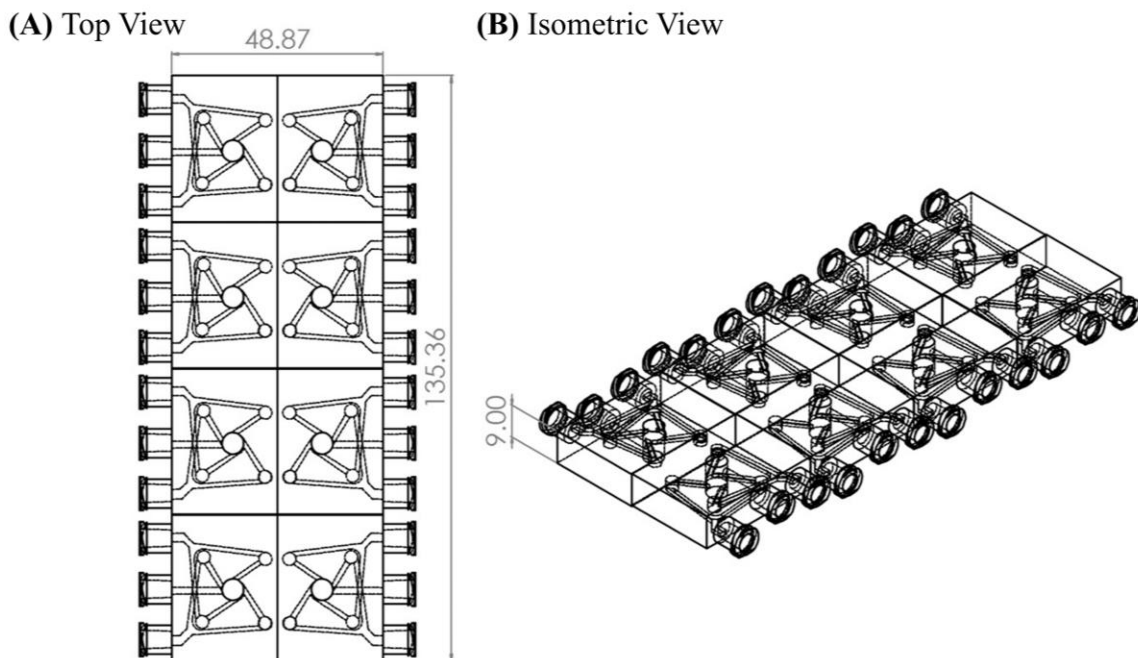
(A) Top view and (B) isometric view of the array of the merged-inlet wells with marked dimensions.
